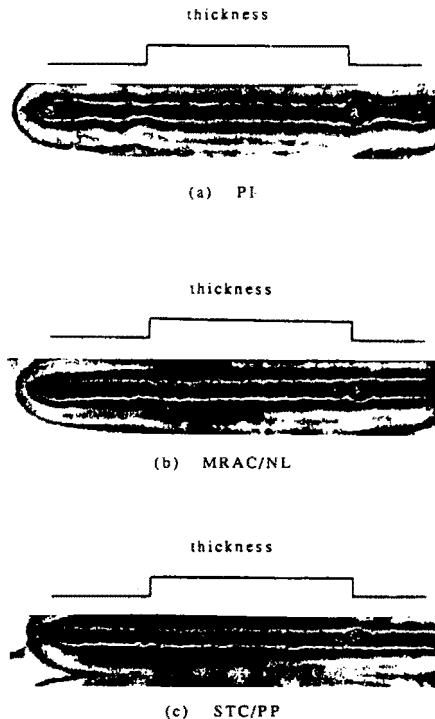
Back side bead of three welding under thickness change disturbance
